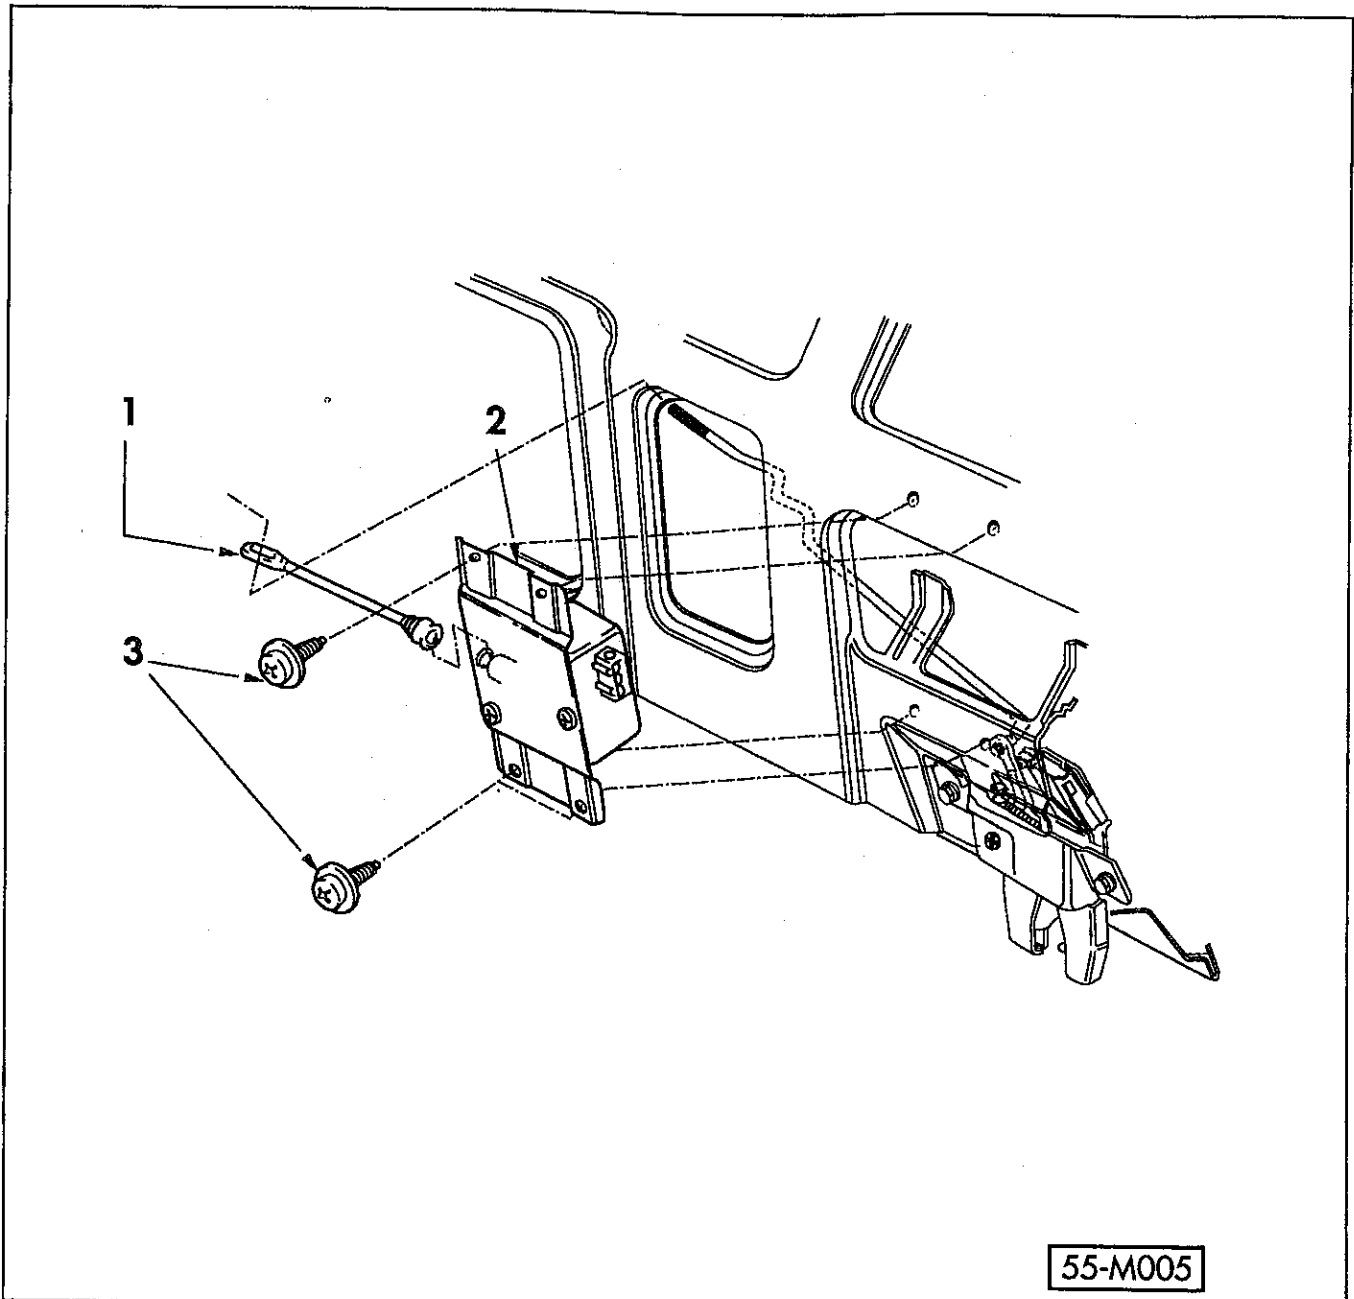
Remote rear lid electric actuator assembly used on some Jetta models.
